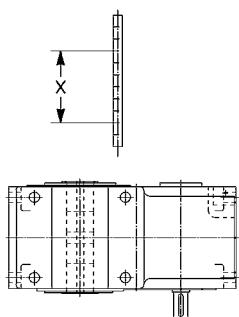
Position the helical gear reducer or gearmotor, mounting position V6 for oil level (quantity) measurement
